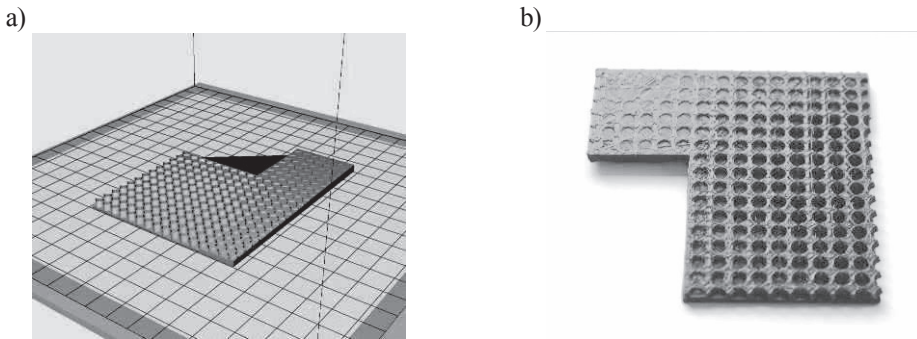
Prototype production: a) 3D printer interface (CURA), b) produced part.
